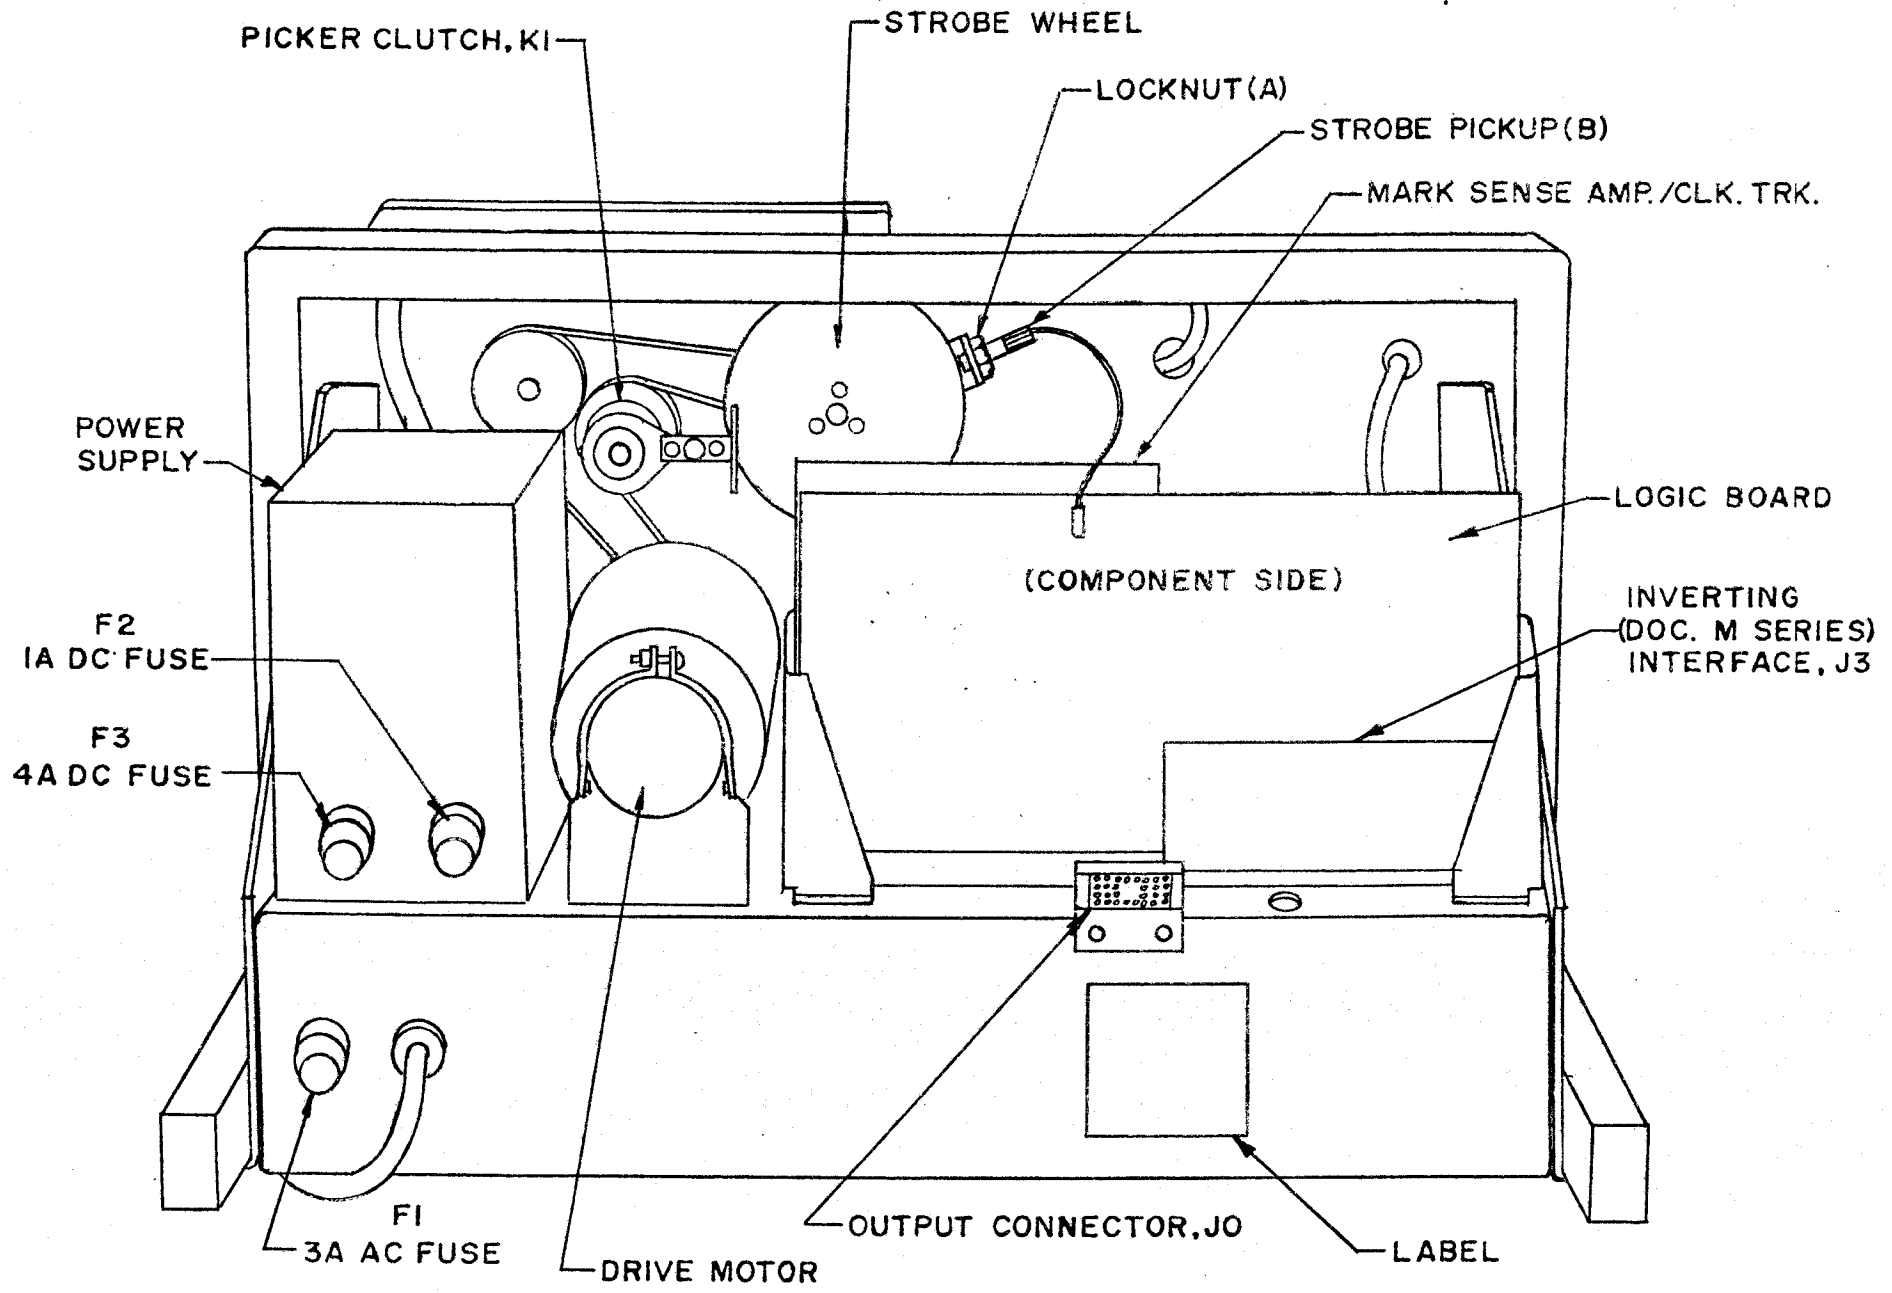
REAR VIEW OF CARD READER, REAR COVER REMOVED
